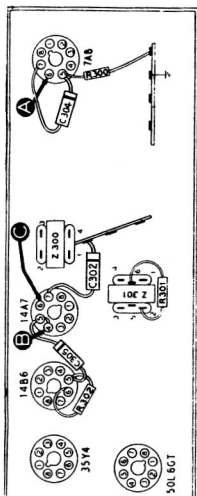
BOTTOM VIEW, SHOWING SECTION 3 TEST POINTS
